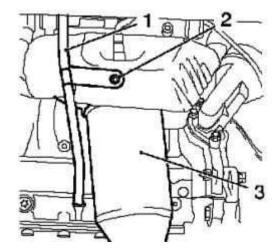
Removing the tube probe for measuring the oil level: 1 - guide tube probe for measuring the oil level 2 - bolt krepelniya 3 - intake manifold
